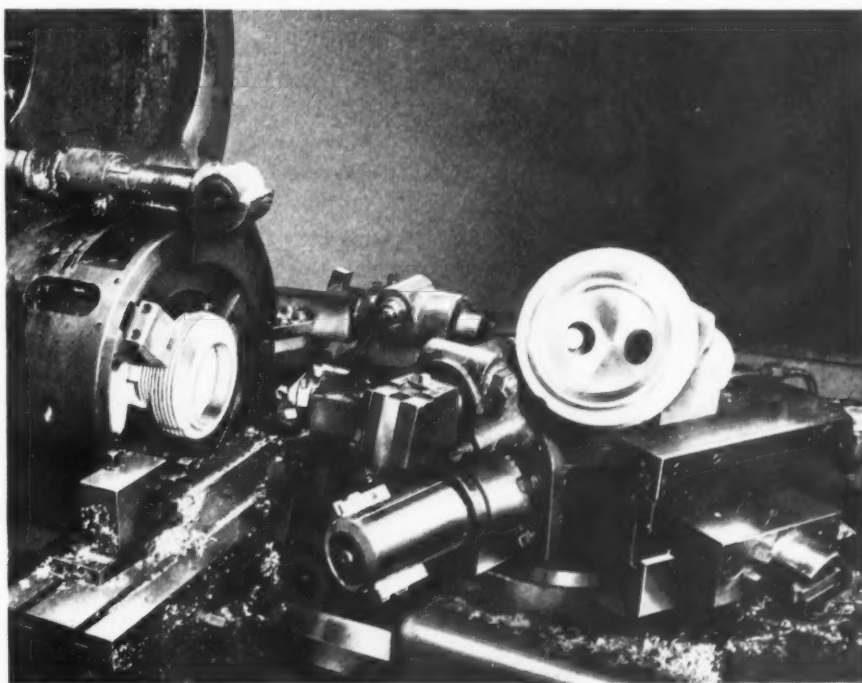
Automatic Used for Machining the Combustion Chamber and Other Surfaces on Cylinder-head Castings
